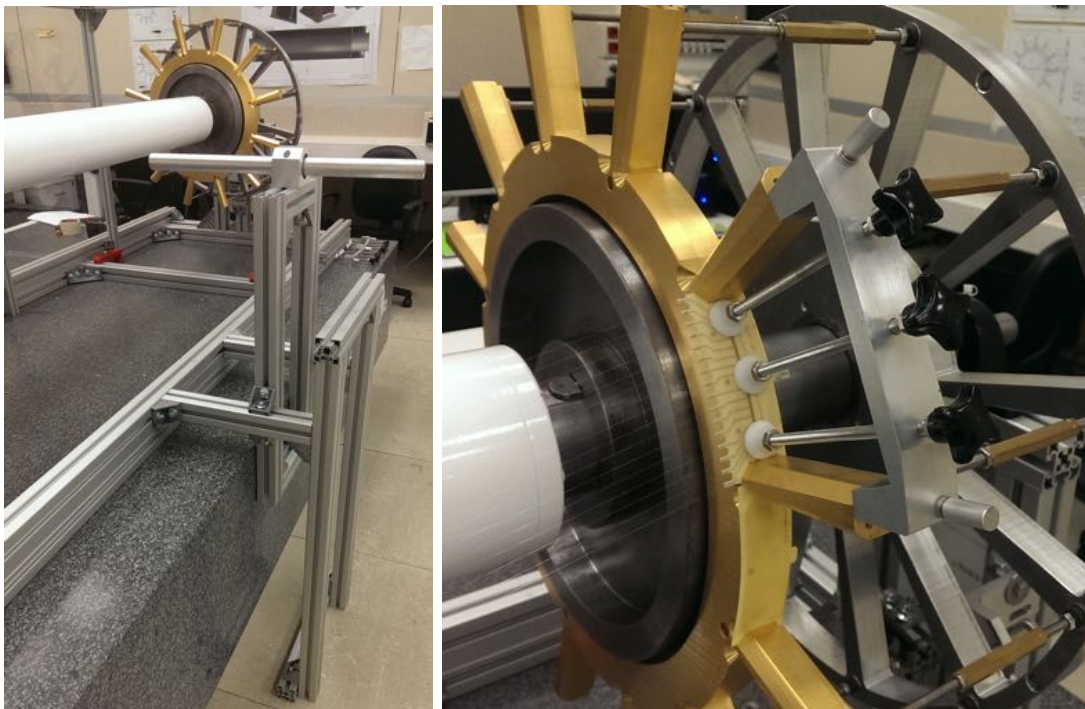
Left: support structure used for assembly with the aluminum rod which keeps the mounting arm at the correct level. Right: aluminum holder to keep pressed the wire-PCBs just mounted on CYLDCH.
